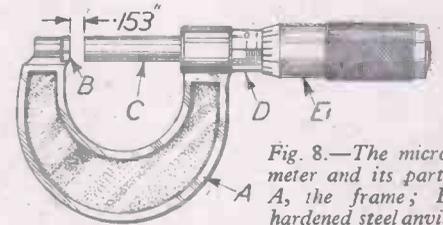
The micrometer and its parts. A, the frame; B, hardened steel anvil; C, spindle; D, sleeve; E, thimble. The reading is 0.153 in.
